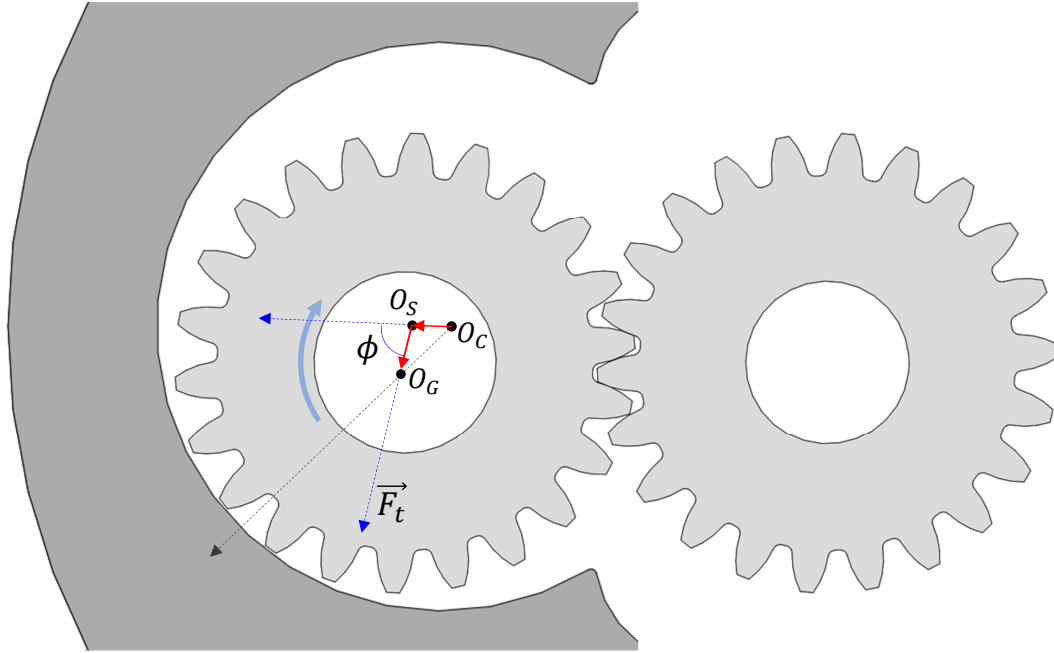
Illustration of gear micromotion. O_C , O_S and O_G are the centers of casing, shaft and gear, respectively. \vec{F}_t indicates the direction of net radial force acting on the gear. The shaft achieves an eccentric position to carry the load (ϕ is the attitude angle). The gear moves in direction of \vec{F}_t by the magnitude of the clearance between gear and shaft.
